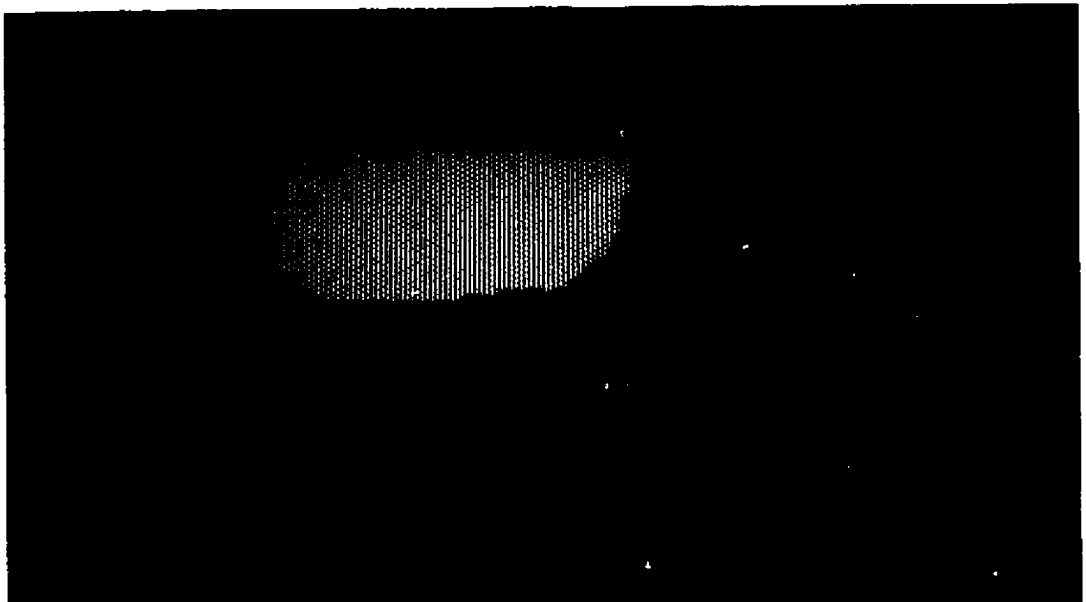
Processed image of the tool after machining the AISI C1045 steel for 26.0 mins
